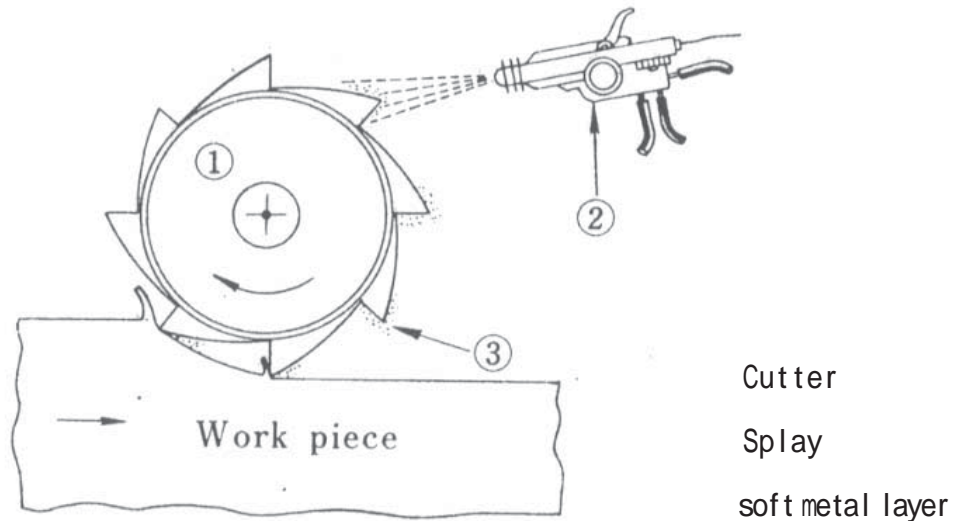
Metal splaying cutting ⁴⁻²⁾
